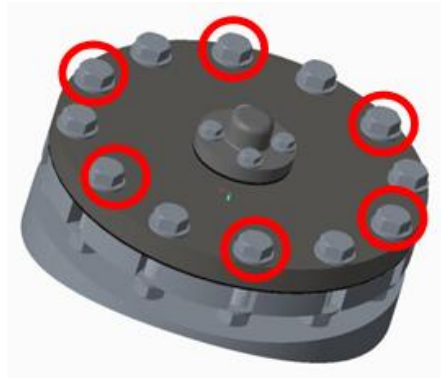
Illustration of Explosive Bolt Locations in Flange; JR11.
